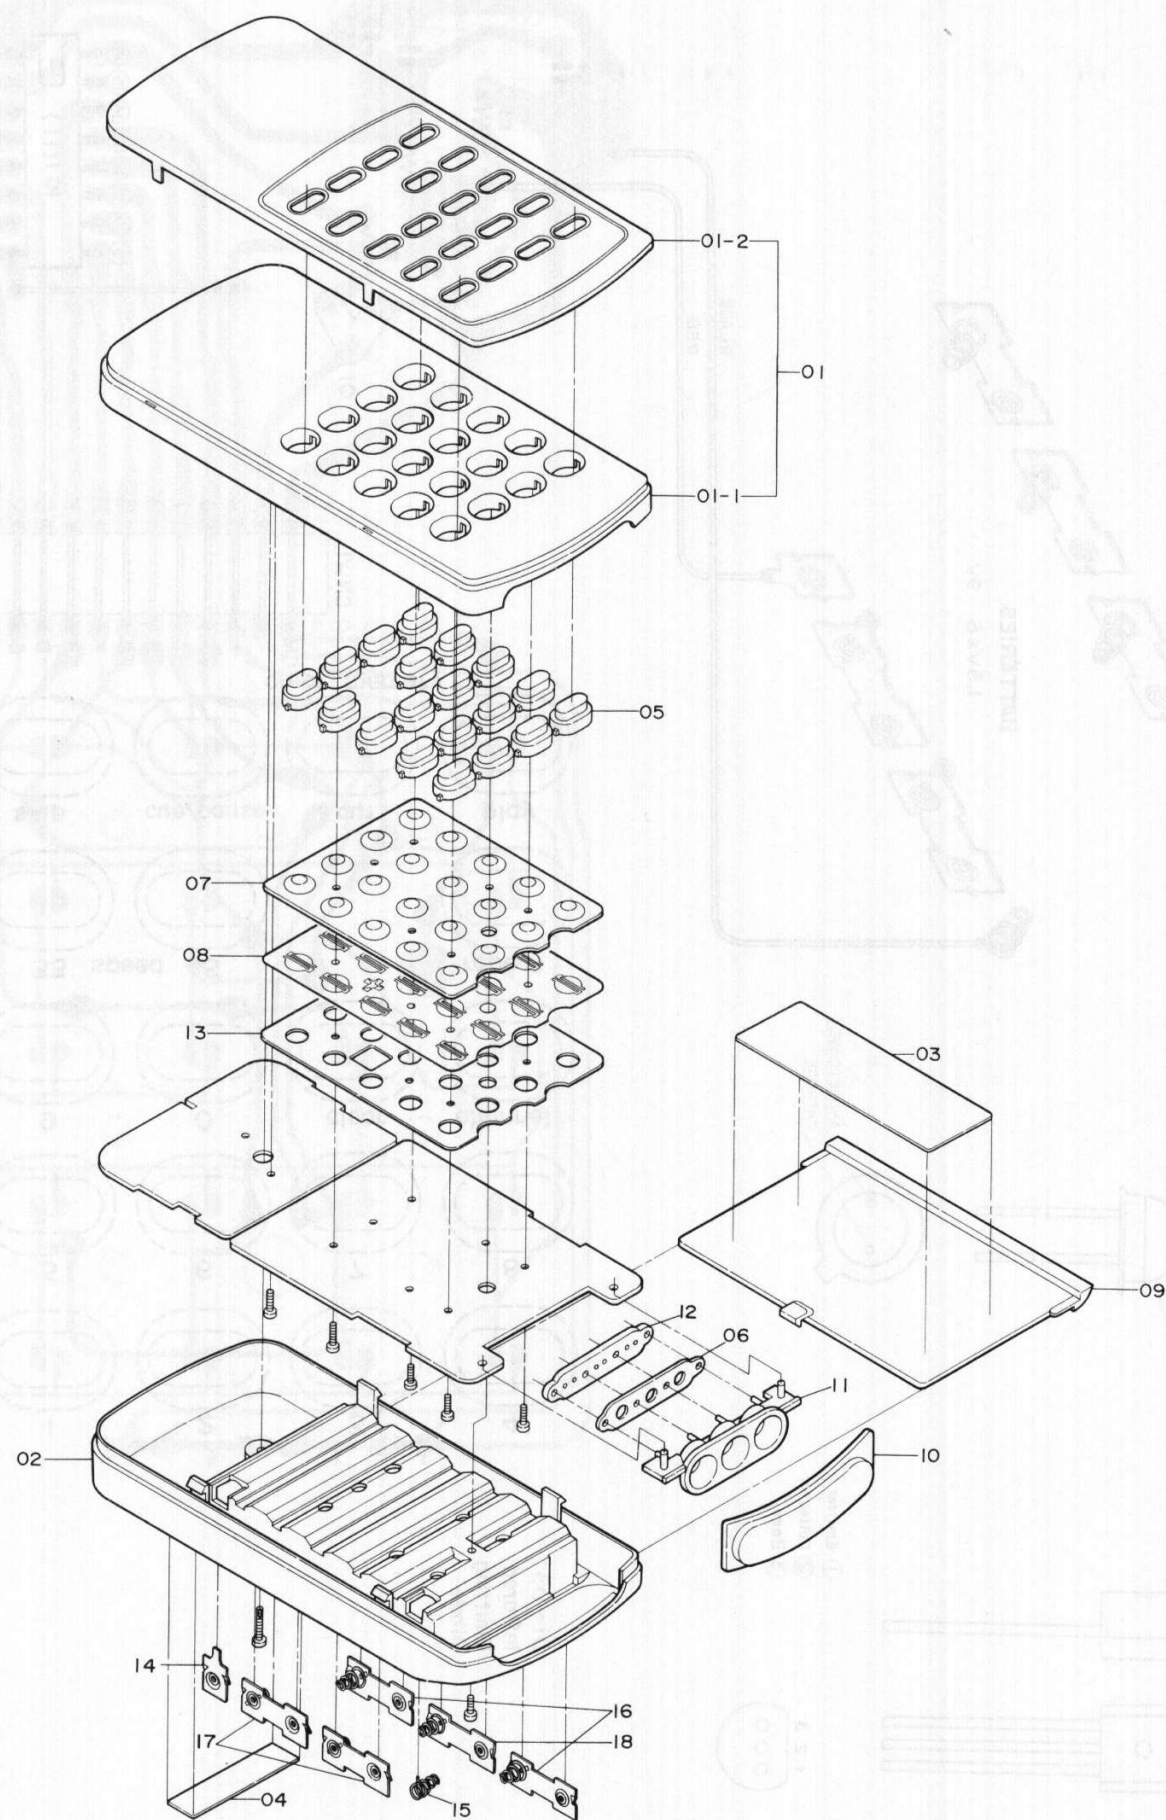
CABINET EXPLODED VIEW (REMOTE CONTROL UNIT)
